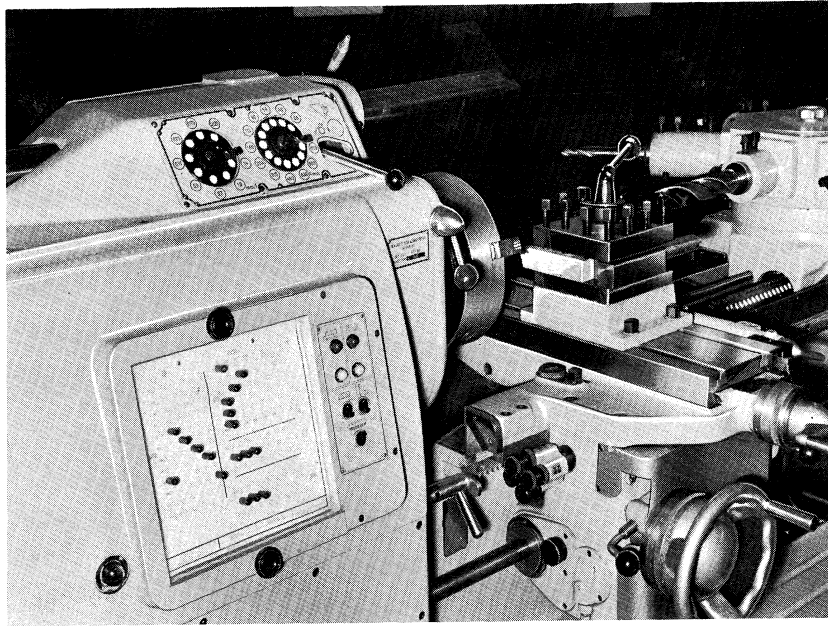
Turret Lathe made in Hungary. Swing 21 in. over bed and 10 in. over cross slide.
